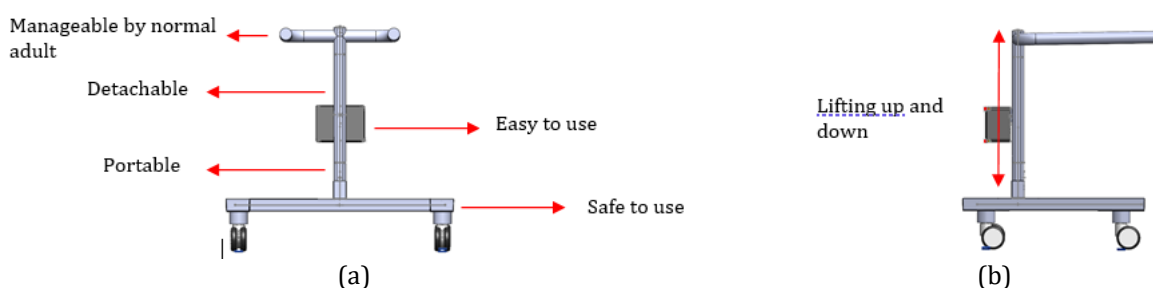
(a) Front view (b) Side view of the main component of transfer mechanism for software design
